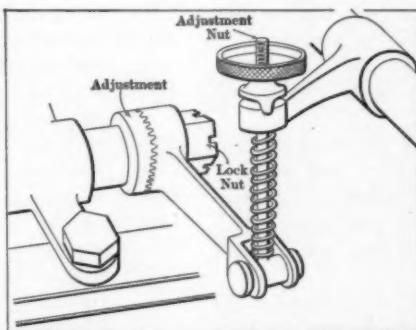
Method of altering present bell crank brake fittings so that wear can immediately be taken up
